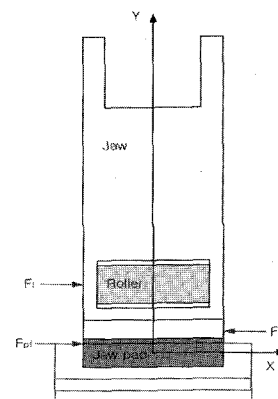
The schematic drawing of forces in the vicinity of jaw pad
